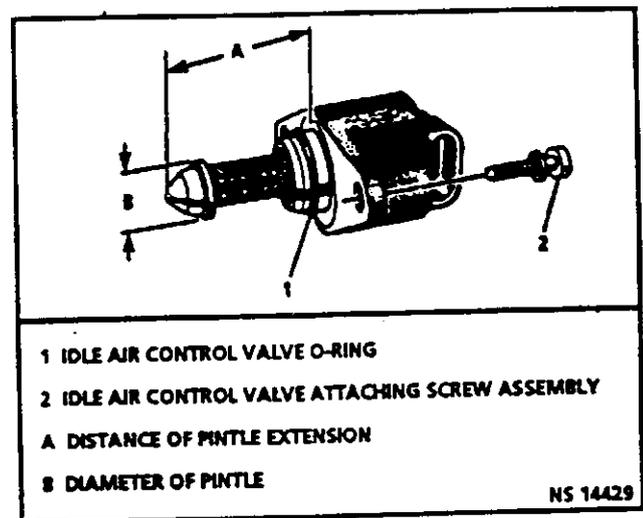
Flange-Mount Idle Air Control Valve
